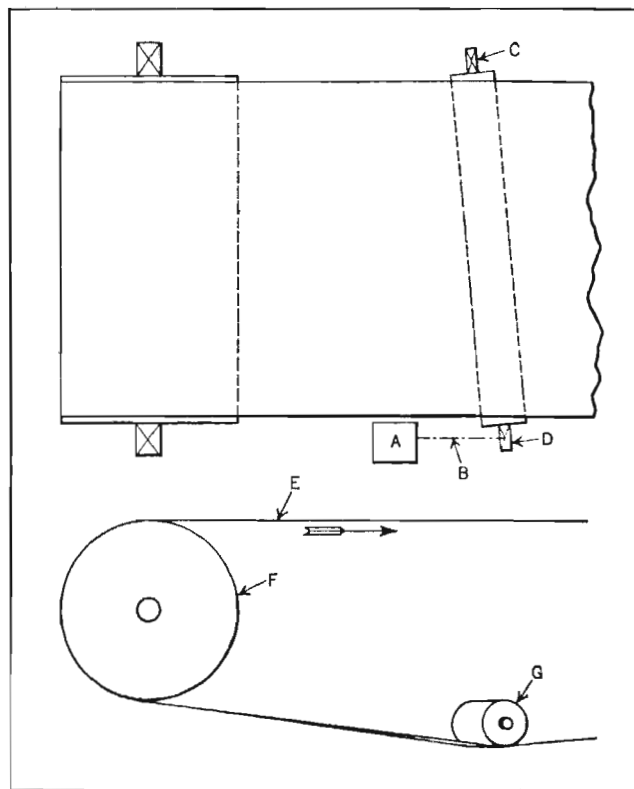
Diagram Showing Swinging Idler Roll which is Actuated by Mechanism Shown in Fig. 19
